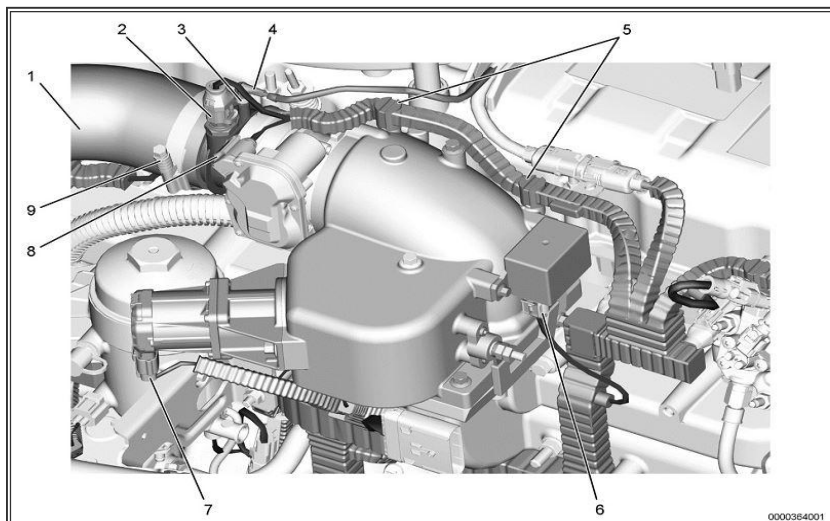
Charge Air Cooler (CAC) Inlet Tube and Engine Harness Connectors
